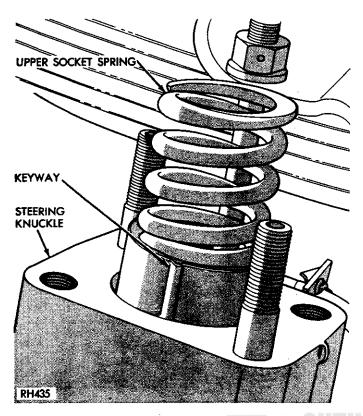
Sleeve Keyway Alignment On Steering Knuckle
